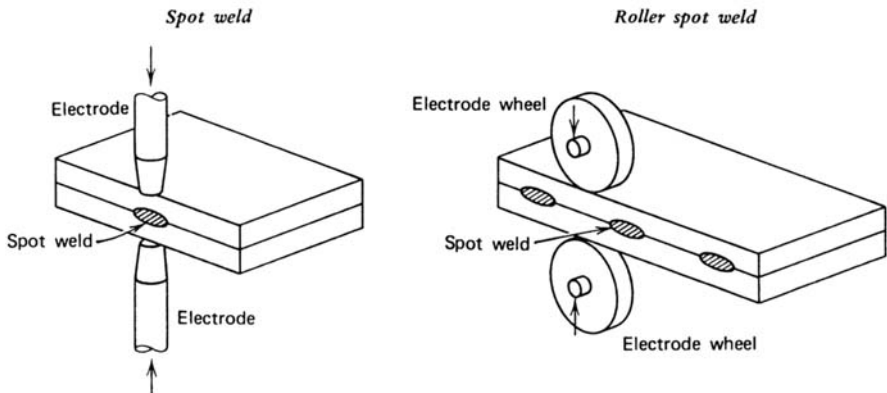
Two types of resistance welding: spot welding and roller spot welding.
